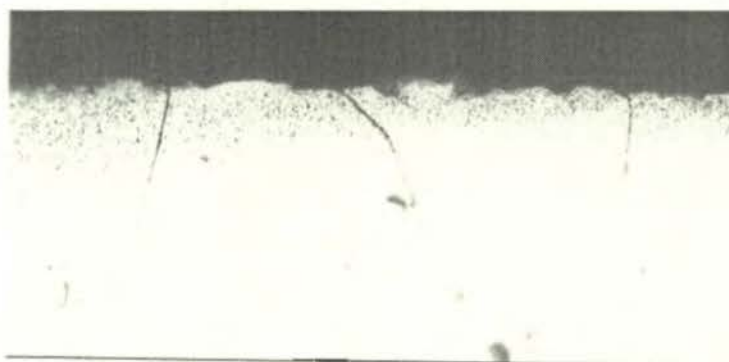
173 Evidence of initial surface tearing after face milling Waspaloy with KC720 tool for 5 seconds at 25 m/min and 0.14 mm/tooth
